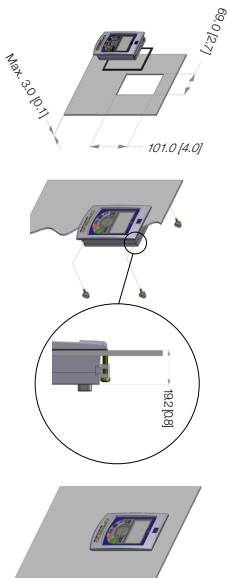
CFW500-HMIR dimensions in mm [in] and panel mounting
